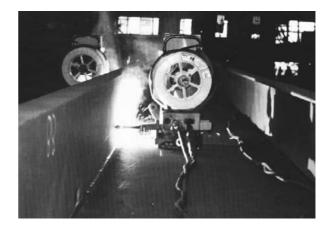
Fillet welding of longitudinal components by using a portable fillet welding carriage and MX-200 in shipbuilding (Photo courtesy of Tuneishi Shipyard, Japan).
